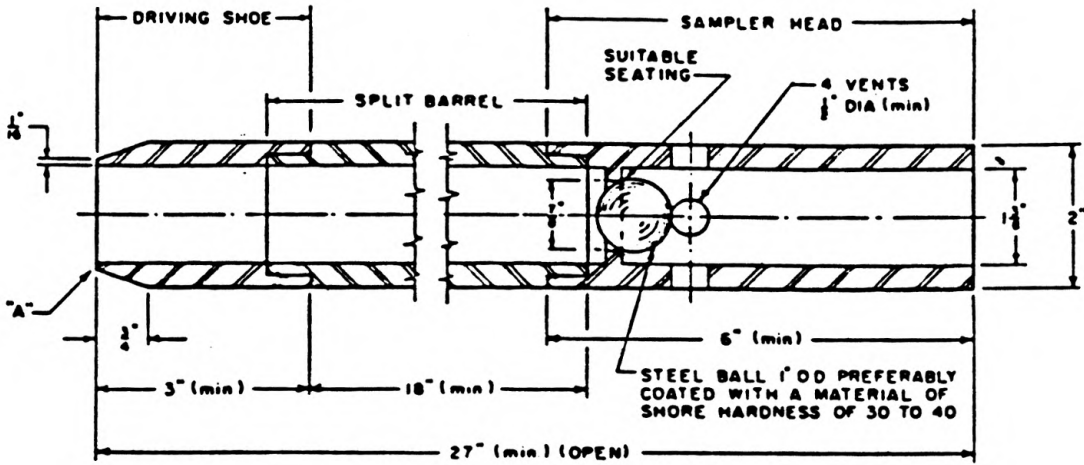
Standard Split Barrel Sampler Assembly. (25)
